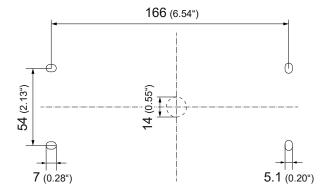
Drilling pattern of polycarbonate enclosure in mm / inch
